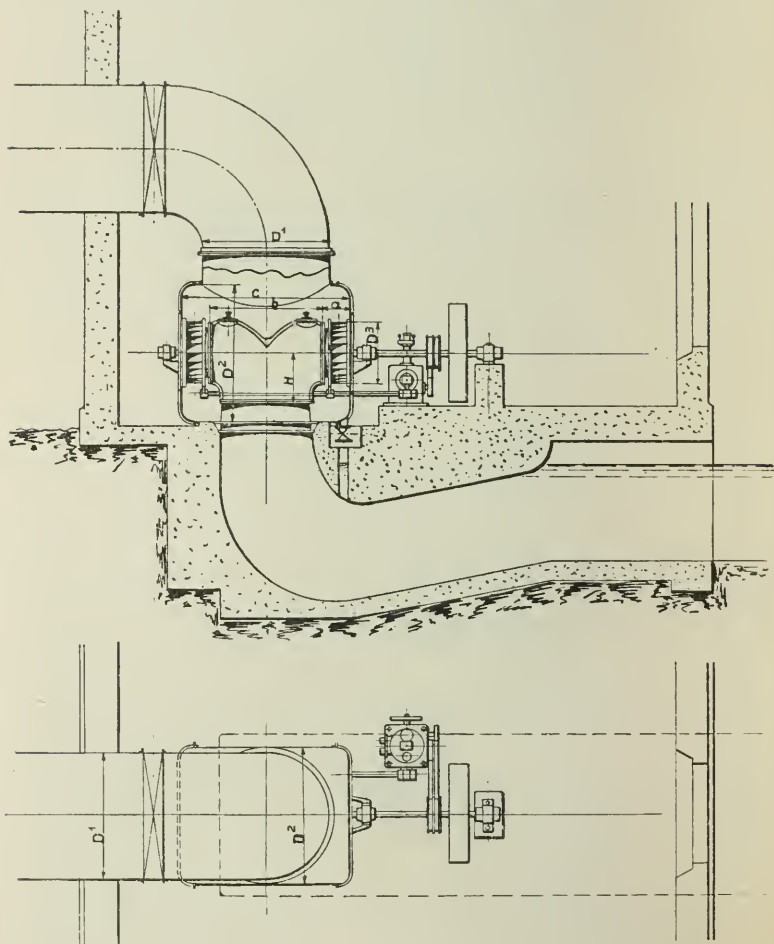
DOUBLE FRANCIS TURBINE, HORIZONTAL SHAFT AND CYLINDRICAL CASING.
